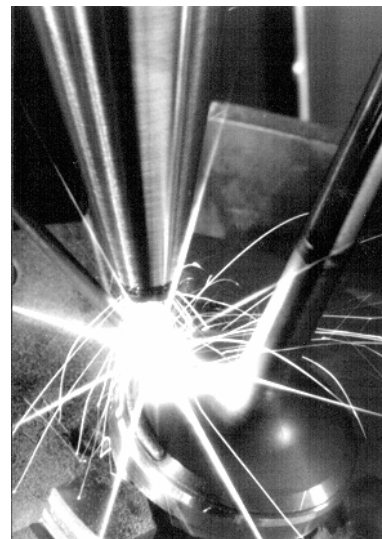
Laser cladding of a diesel engine intake valve. (Photo Univ. Twente)
